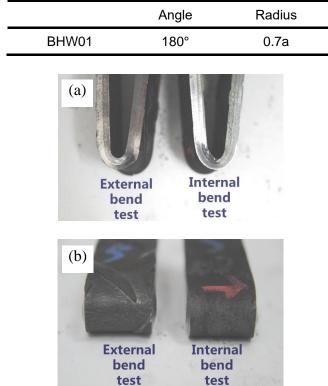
Photos of specimen after cold bend tests (a) the edge of the specimens;(b) the surface of the specimens
